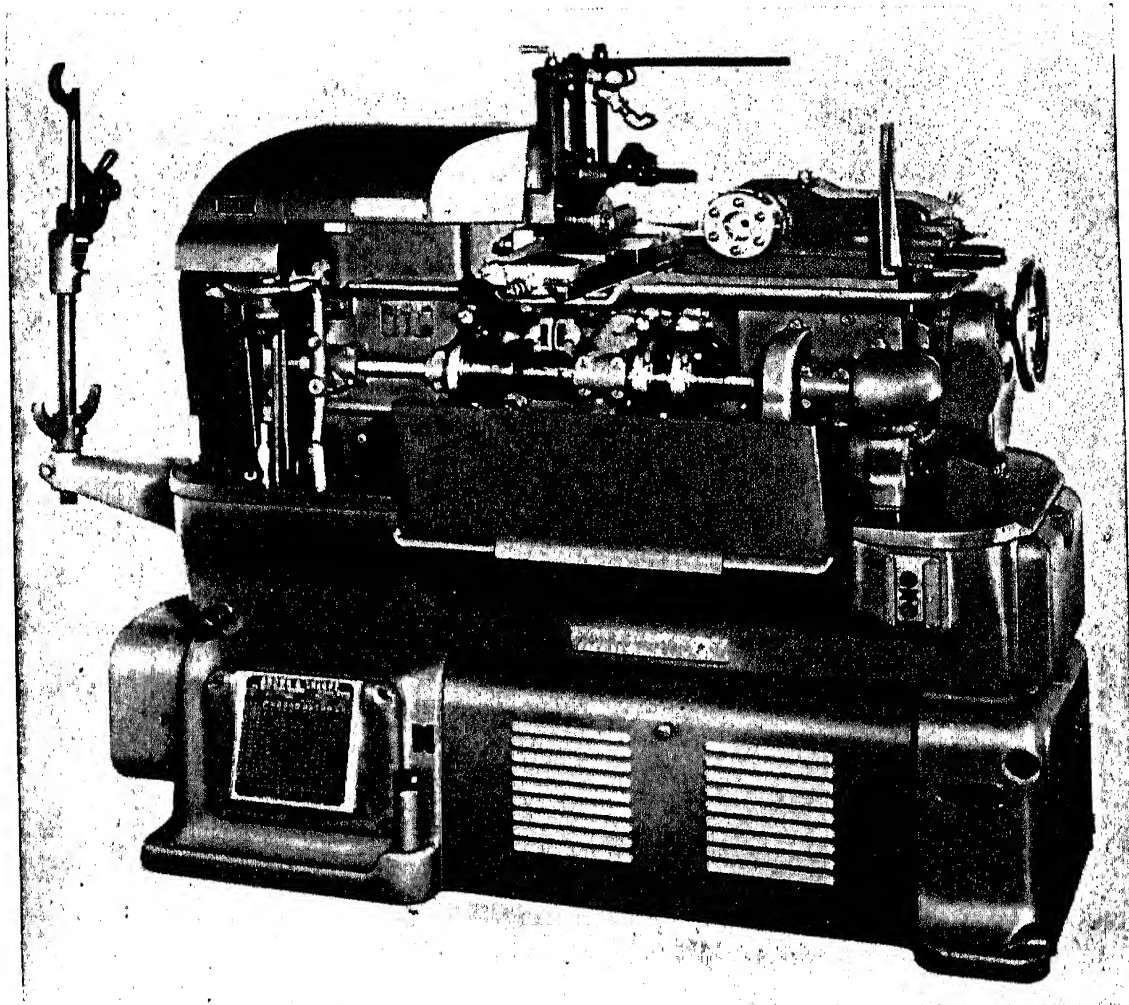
A No. 2G single spindle automatic screw machine.
